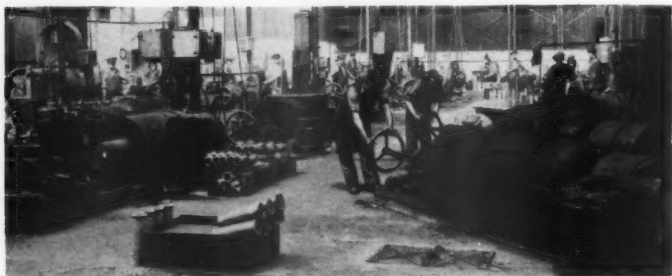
CENTRIFUGAL CASTING FOUNDRY OF SHEEPBRIDGE STOKES CENTRIFUGAL CASTINGS CO., LTD., ENGLAND.
